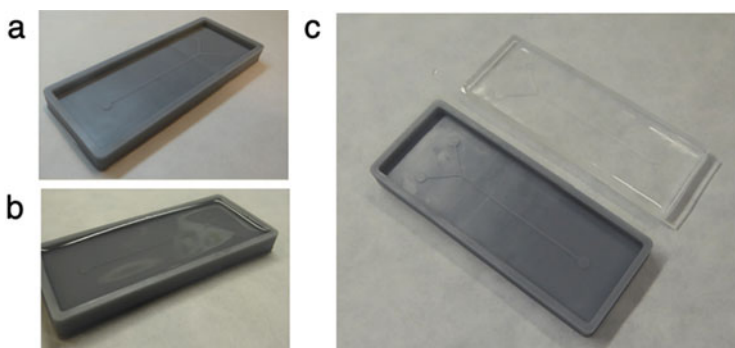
Fabrication of the PDMS chip. (a) 3D printed mold. (b) PDMS is poured on the channel structure. (c) The cross-linked PDMS is peeled off the mold
